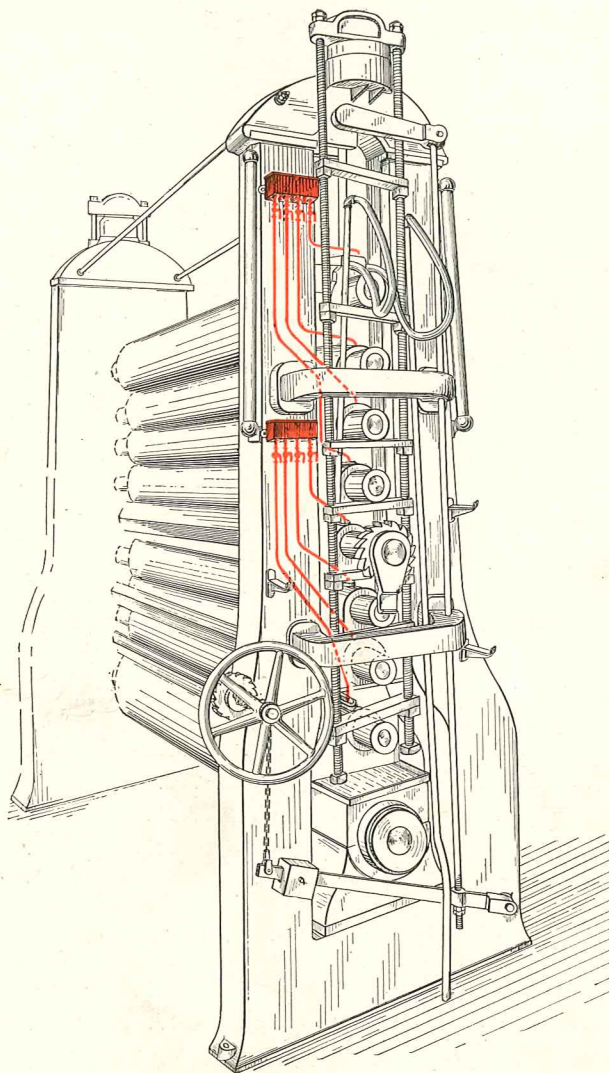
Multiple wick feed oilers on calender stacks of paper mill.
